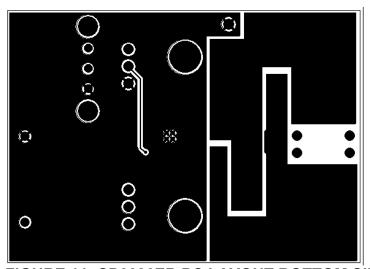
SP6686EB PC LAYOUT BOTTOM SIDE
